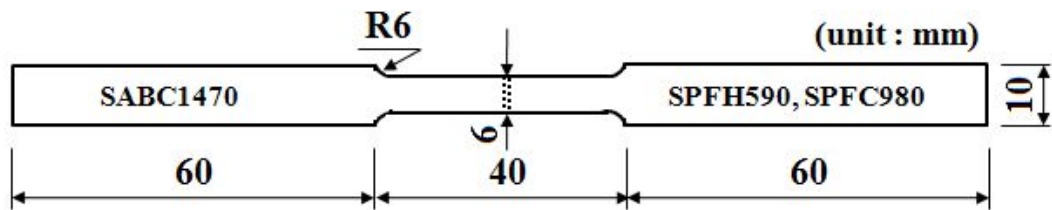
Shape and dimensions of tension specimen of different materials bonded with laser TWB
